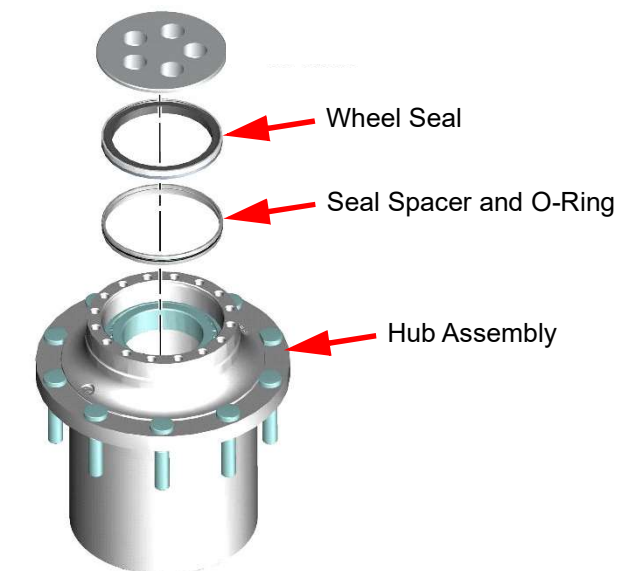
Installing Axle Bearing, Wheel Seal, Seal Spacer (with O-Ring) into Hub Assembly
